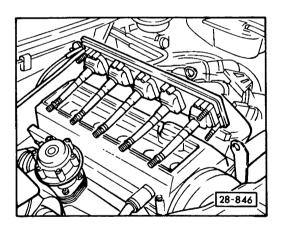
Ignition coils N/N 128/N 158/N 163/N 164
